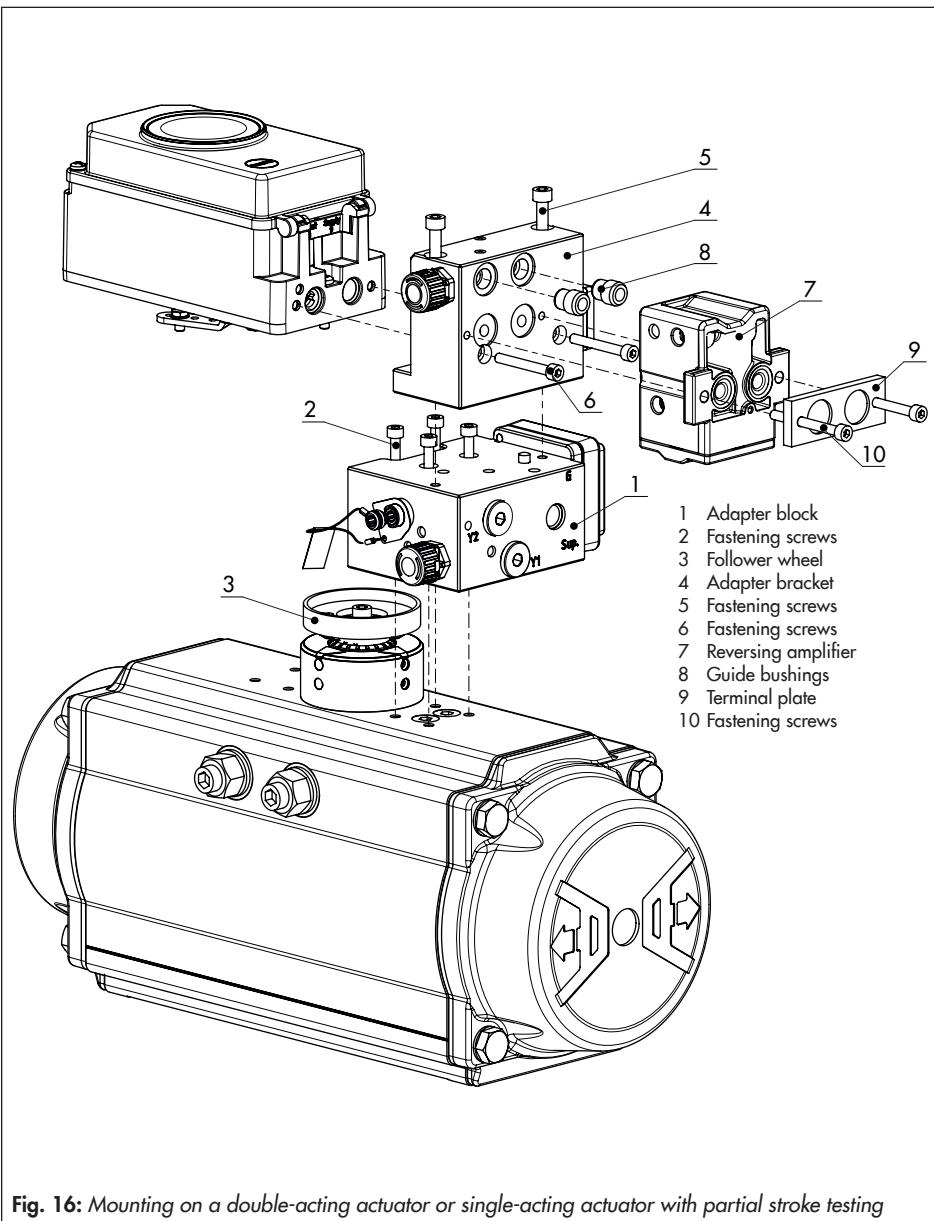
Mounting on a double-acting actuator or single-acting actuator with partial stroke testing
